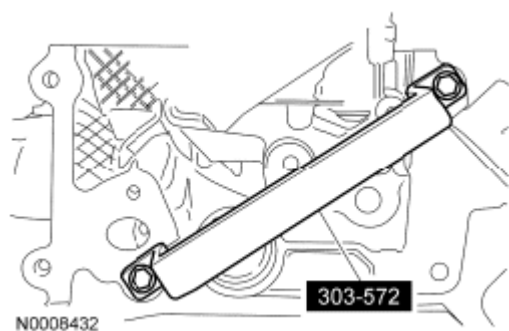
Locating Cylinder Head Remover/Installer Onto RH Cylinder Head
